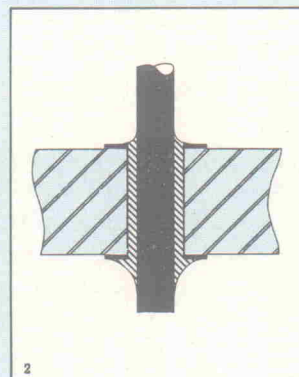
Cross-section of typical joint in plated-through hole. Note how little strength is added by fillet of solder over the pad. This drawing is to scale for a TR 4 resistor in a hole 0.8 mm in diameter.
